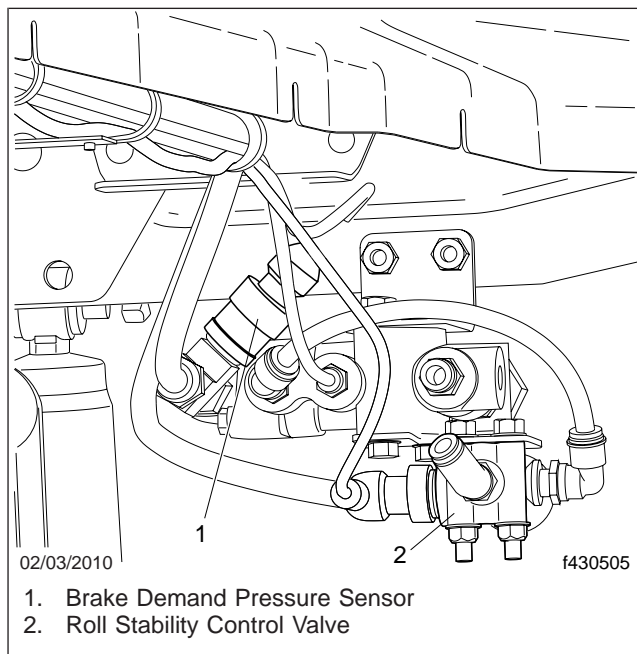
, Pressure Sensor (mounted on trailer protection valve)
